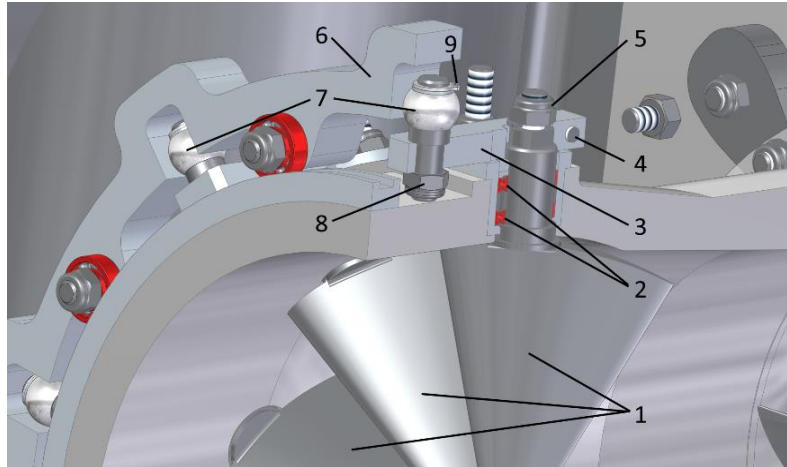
Section through the IGV adjustment mechanism, where: 1 – IGV blade; 2 – ball bearing; 3 – lever; 4 – screw; 5 – nut; 6 – adjusting ring; 7 – spherical ball; 8 – bolt; 9 – retaining rings [image generated by the author]
